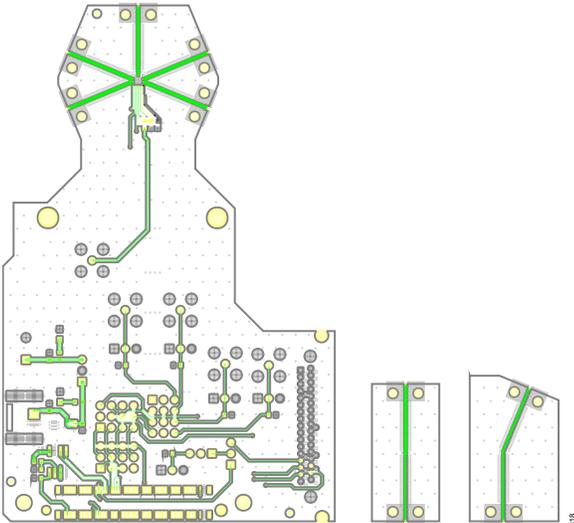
EVAL-ADGM3144SDZ Component Side PCB Drawing (Layer 1)
